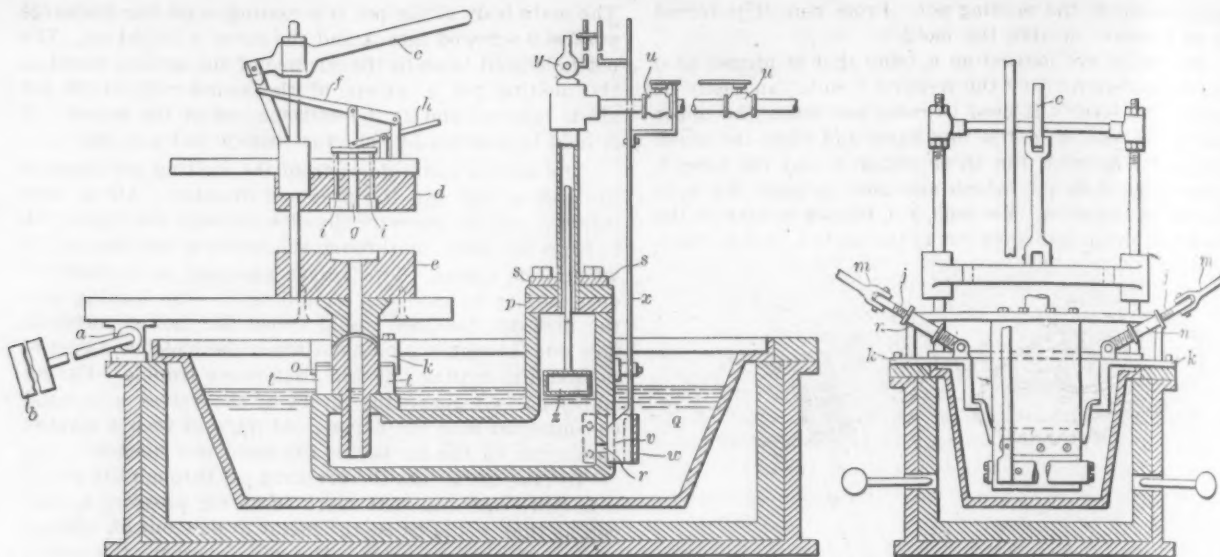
A Machine Operated by Air Pressure with a Tilting Table for the Molds.
